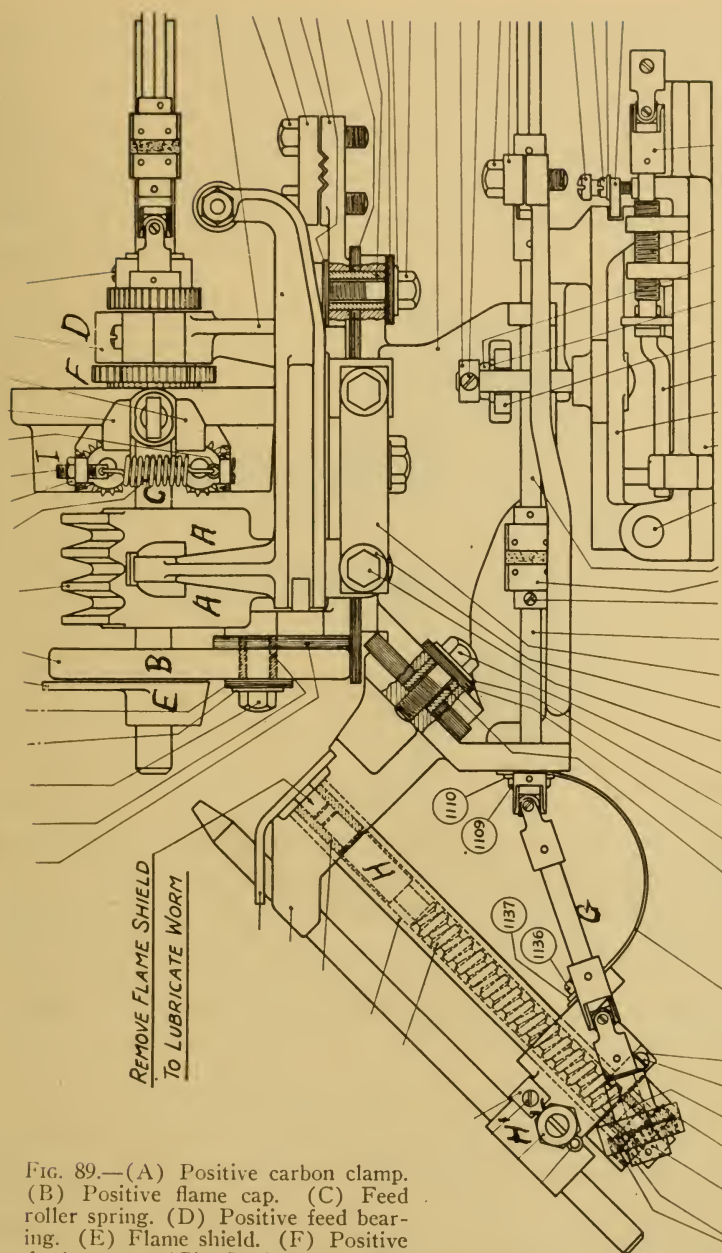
(A) Positive carbon clamp. (B) Positive flame cap. (C) Feed roller spring. (D) Positive feed bearing. (E) Flame shield. (F) Positive feed gear. (G) Shaft that drives negative carbon feeding mechanism. (H) Negative feed worm that pulls negative carbon clamp H upward as carbon is burned away. (I) Nut for adjusting feed roller pressure.
